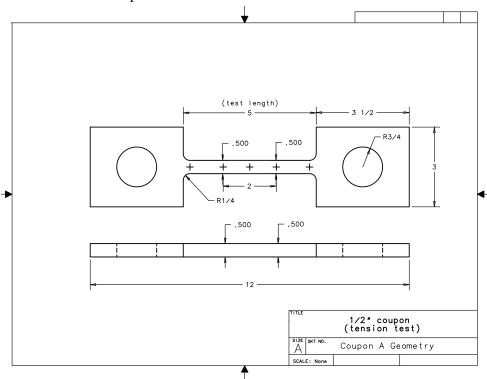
Tensile test specimen 'A' for initial material impact testing.
